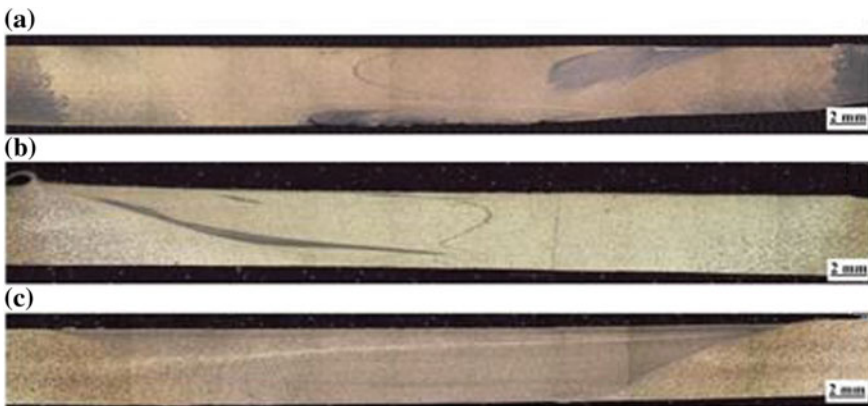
Macrostructures of a triangular tool pin, b hexagonal tool pin and c H13 SC tool
